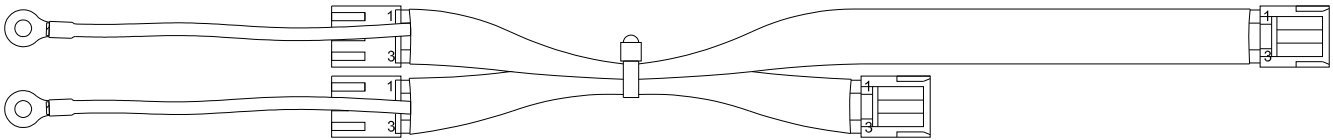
VL4000 Enclosure PFC Output Cable Assembly
